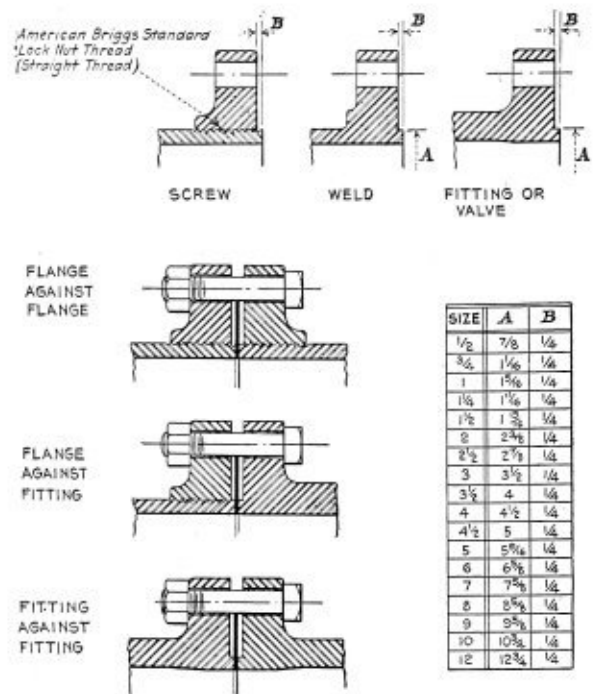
Flange Joints and Methods of Attaching Flanges to Pipe, 3,000-Pound Hydraulic American Standard
